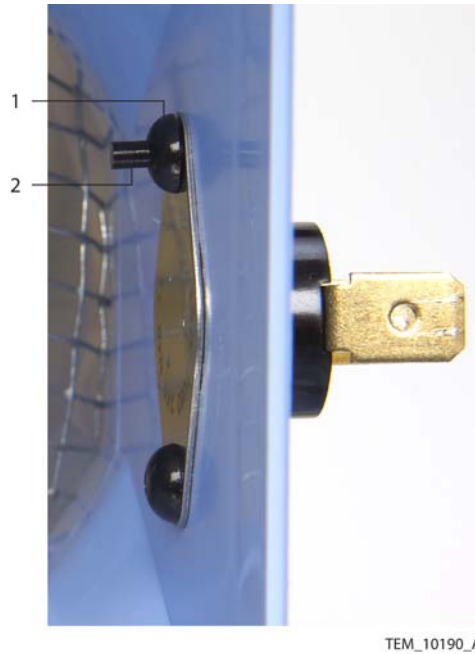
Thermostat Rivets (Outside of Hose Duct Adapter)
